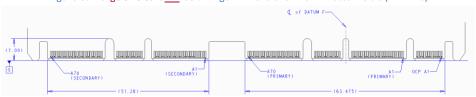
Large Size Card LFF Gold Finger Dimensions – x32 – Bottom Side ("A" Pins)
